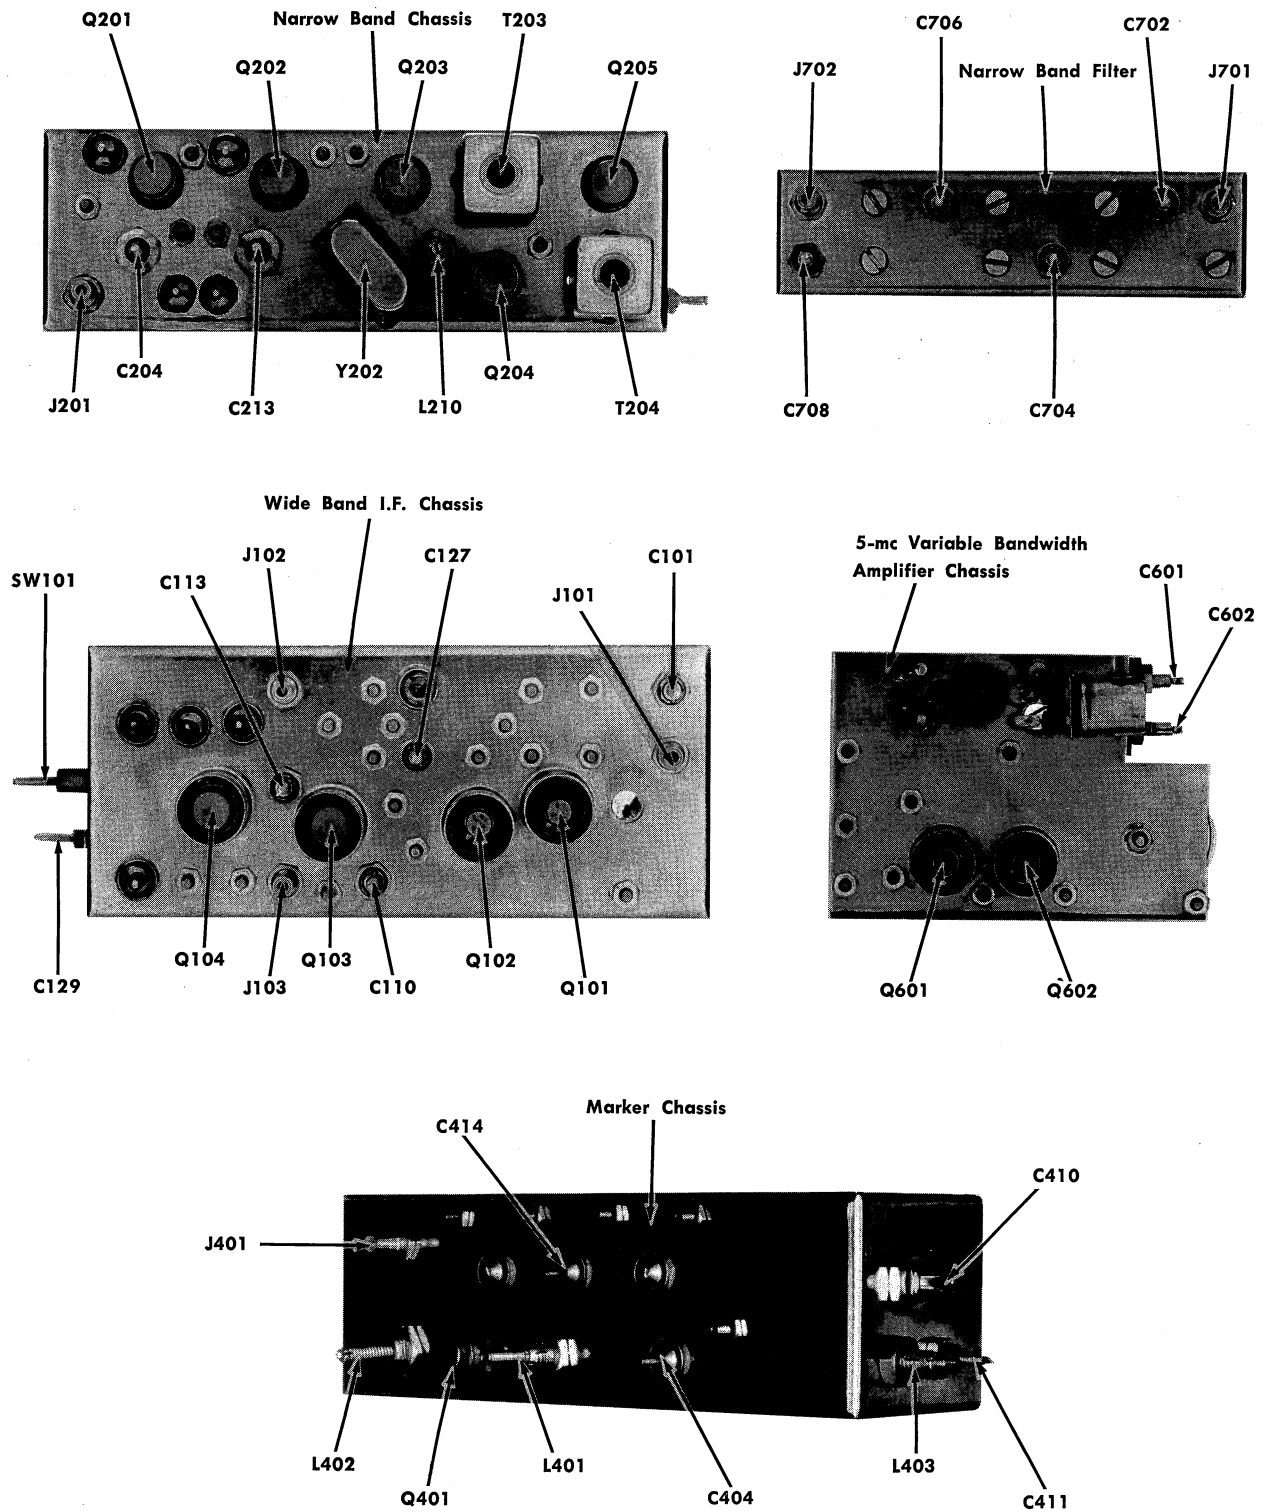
Type L-20/30 Location of test points and adjustments.
